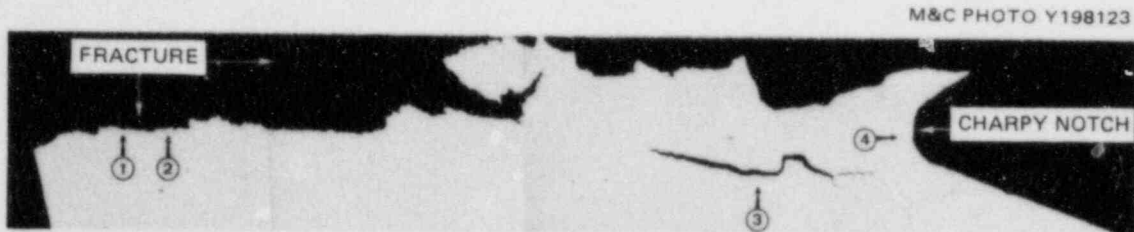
Side view of fracture surface of Charpy specimen CPL 539 tested at -73°C in lower knee of transition region. Notch is located in type 309 weld metal; unnotched side is type 308 weld metal.
